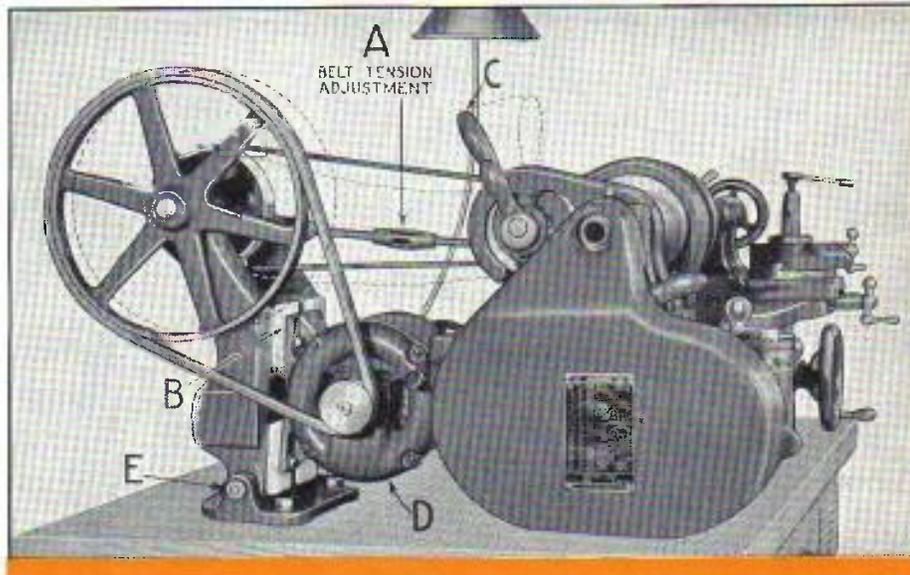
End View of 9-inch "Workshop" Precision Bench Lathe with Horizontal Motor Drive Countershaft—Adjustable Type.
